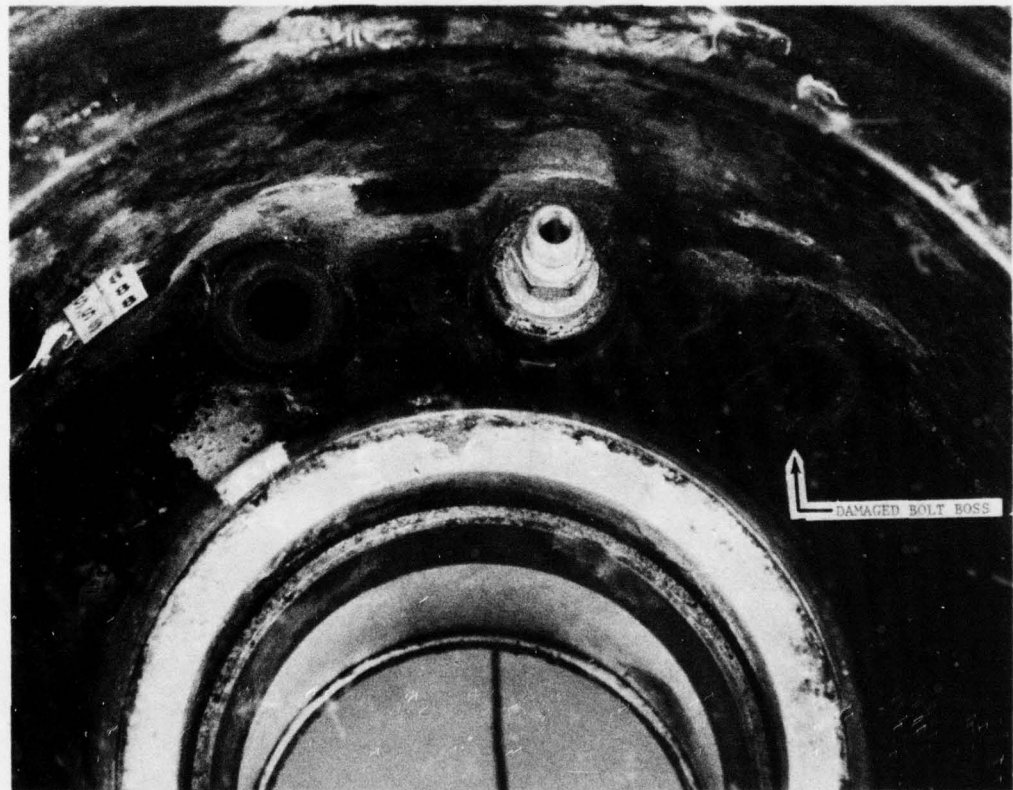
Chipped Bolt Boss - Total Wheel Miles - 3500
